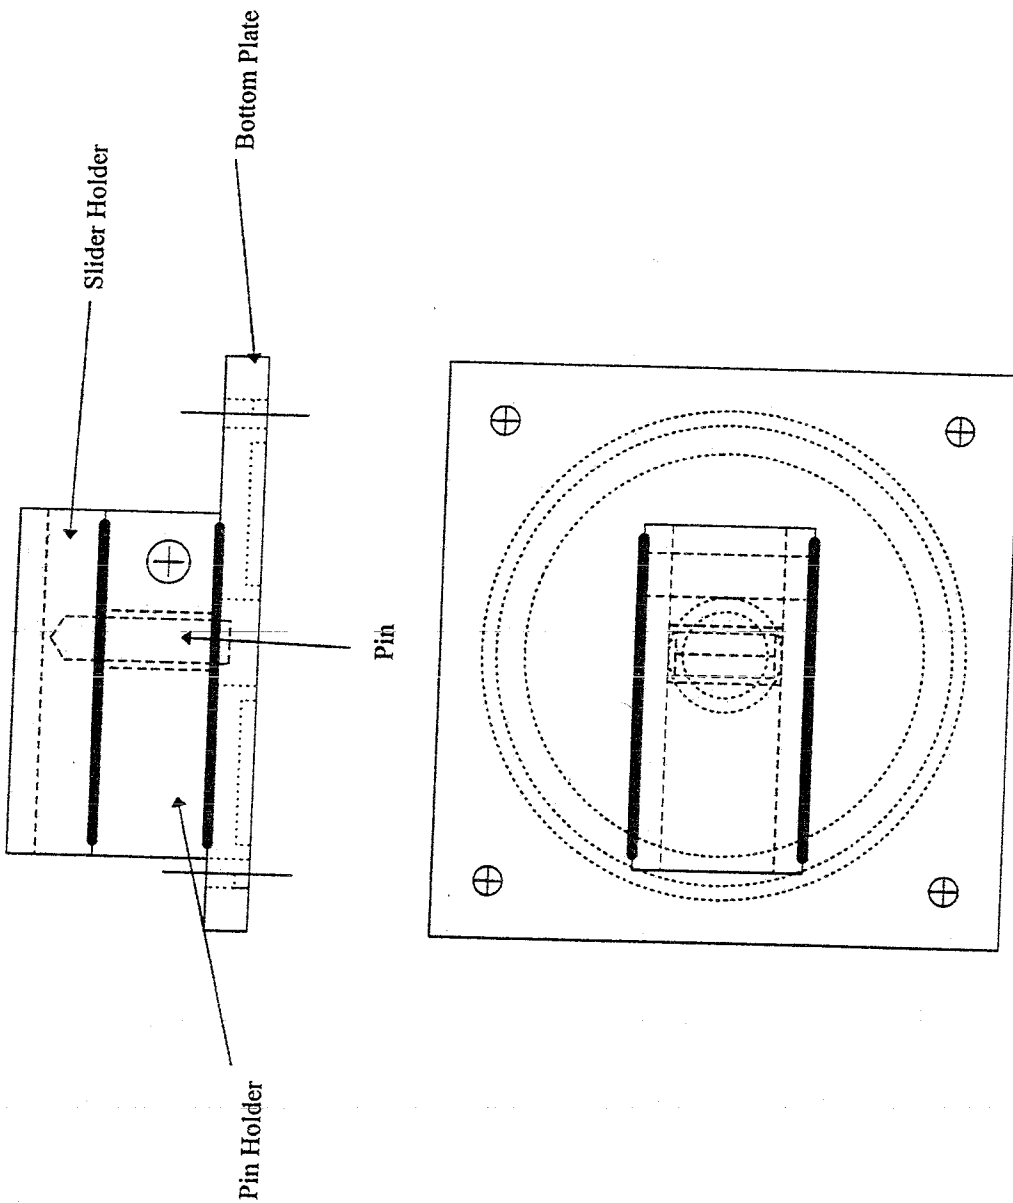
Welds on Bottom Plate, Slider Holder, and Pin Holder
